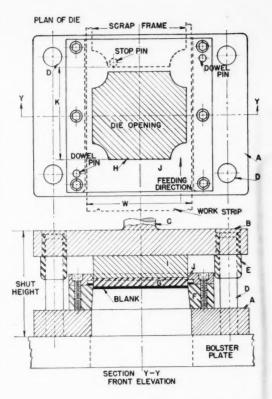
Drawing of a plain blanking die in which a positively attached stripper channel is used.
